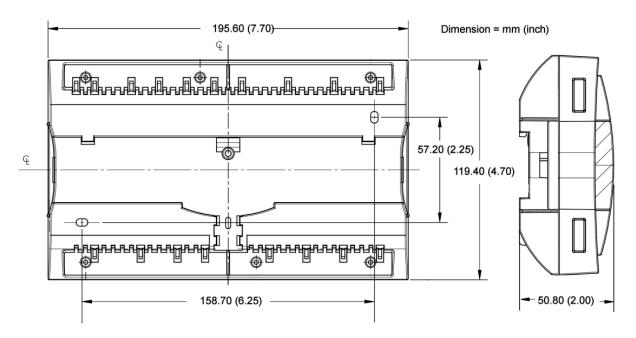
LN-IO401-1 and IO520-1 Module Dimensions, mm (in.)
